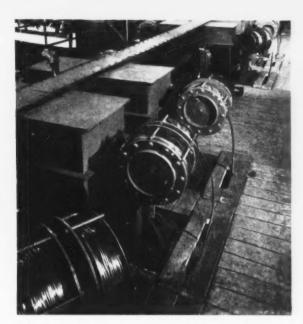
Welding wire and flux are fed automatically from overhead locations. Both the flux hoppers and wire coils are large to permit continuous operation for long periods without stopping to resupply.
